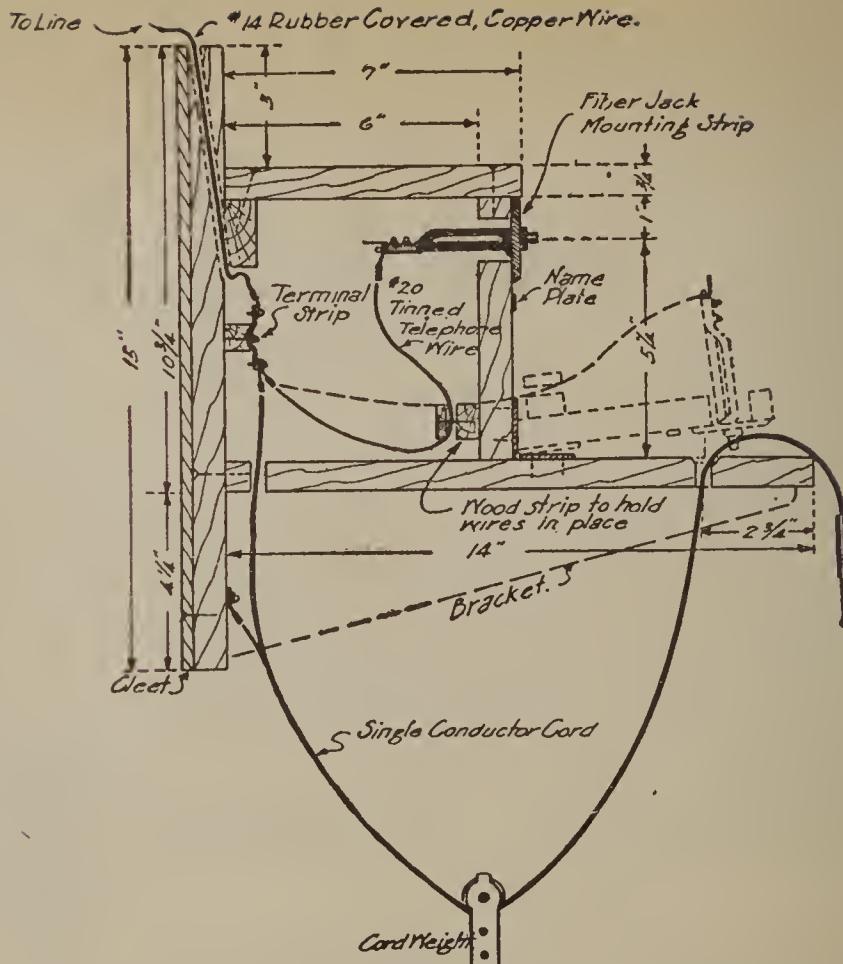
Section of board, showing location of equipment. The name plate to be located directly below each jack (and key), as shown in Figure 44. If extra head phone receivers are not desired, the right-hand jack is not needed
